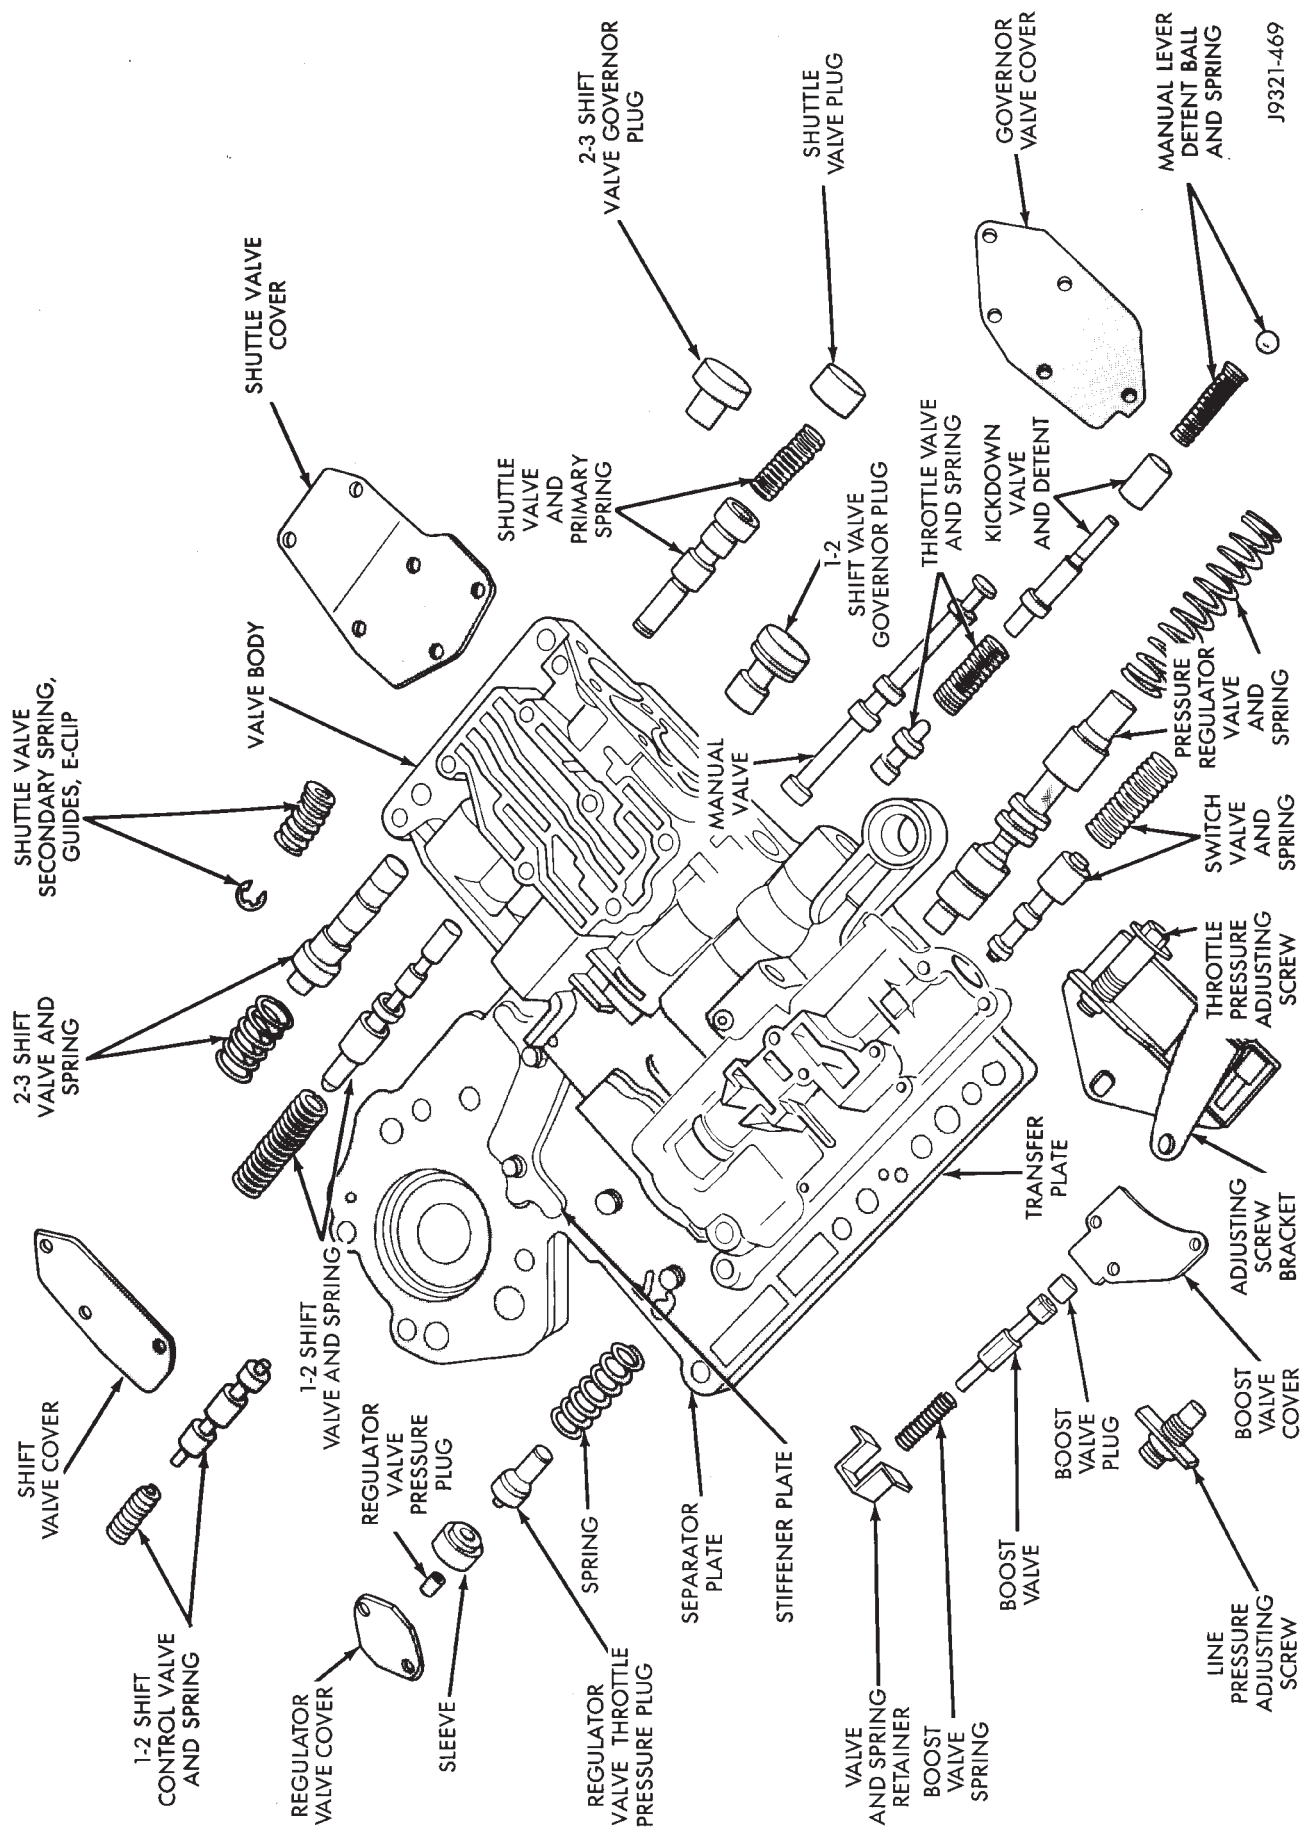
Upper Housing Valves, Plug, Springs And Brackets
